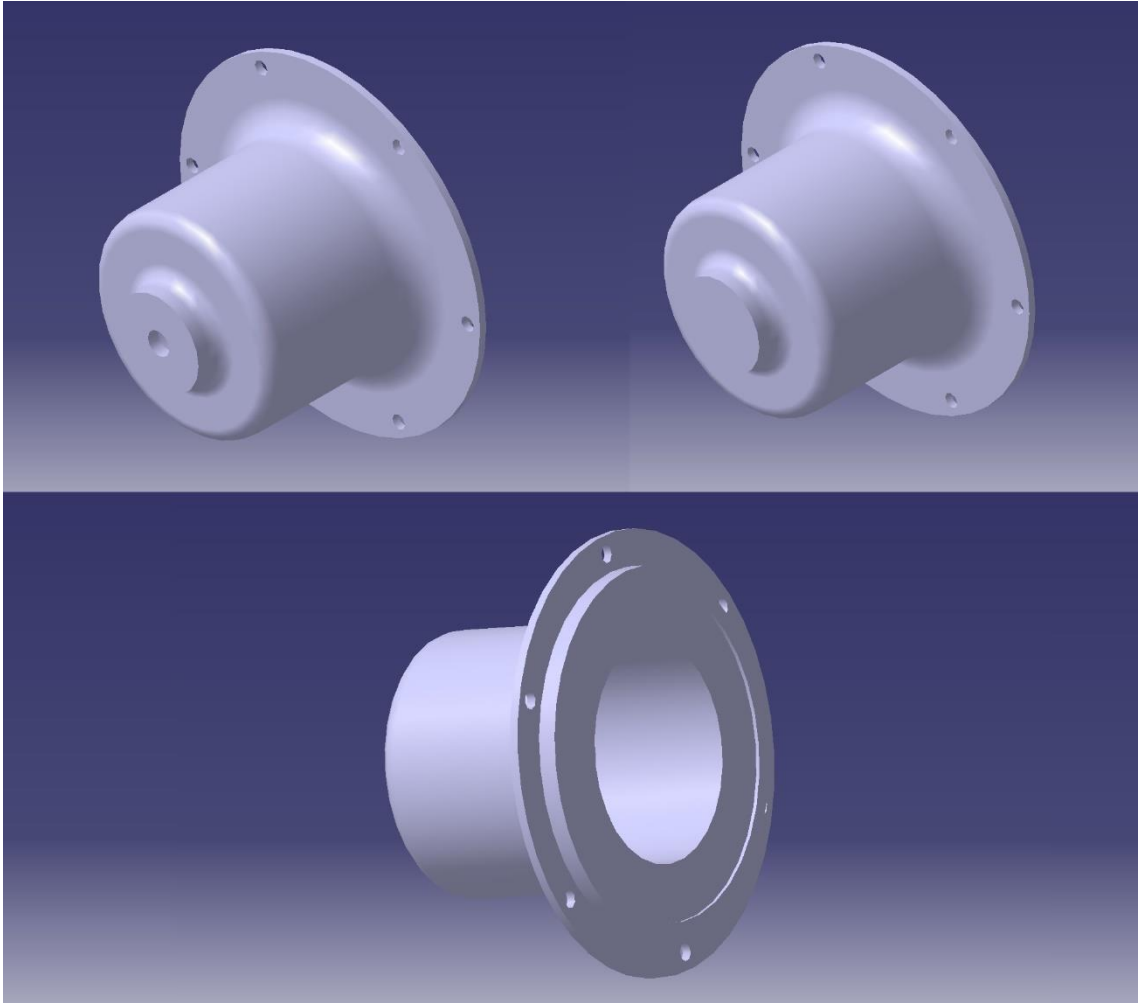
View of the front crankcase (top left and bottom) and back crankcase (top right and bottom).
